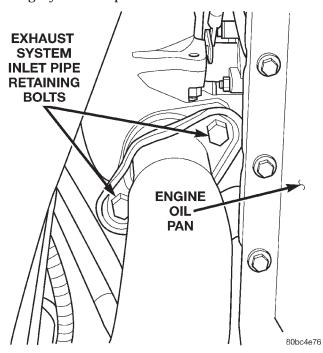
Exhaust System Inlet Pipe Retaining Bolts
